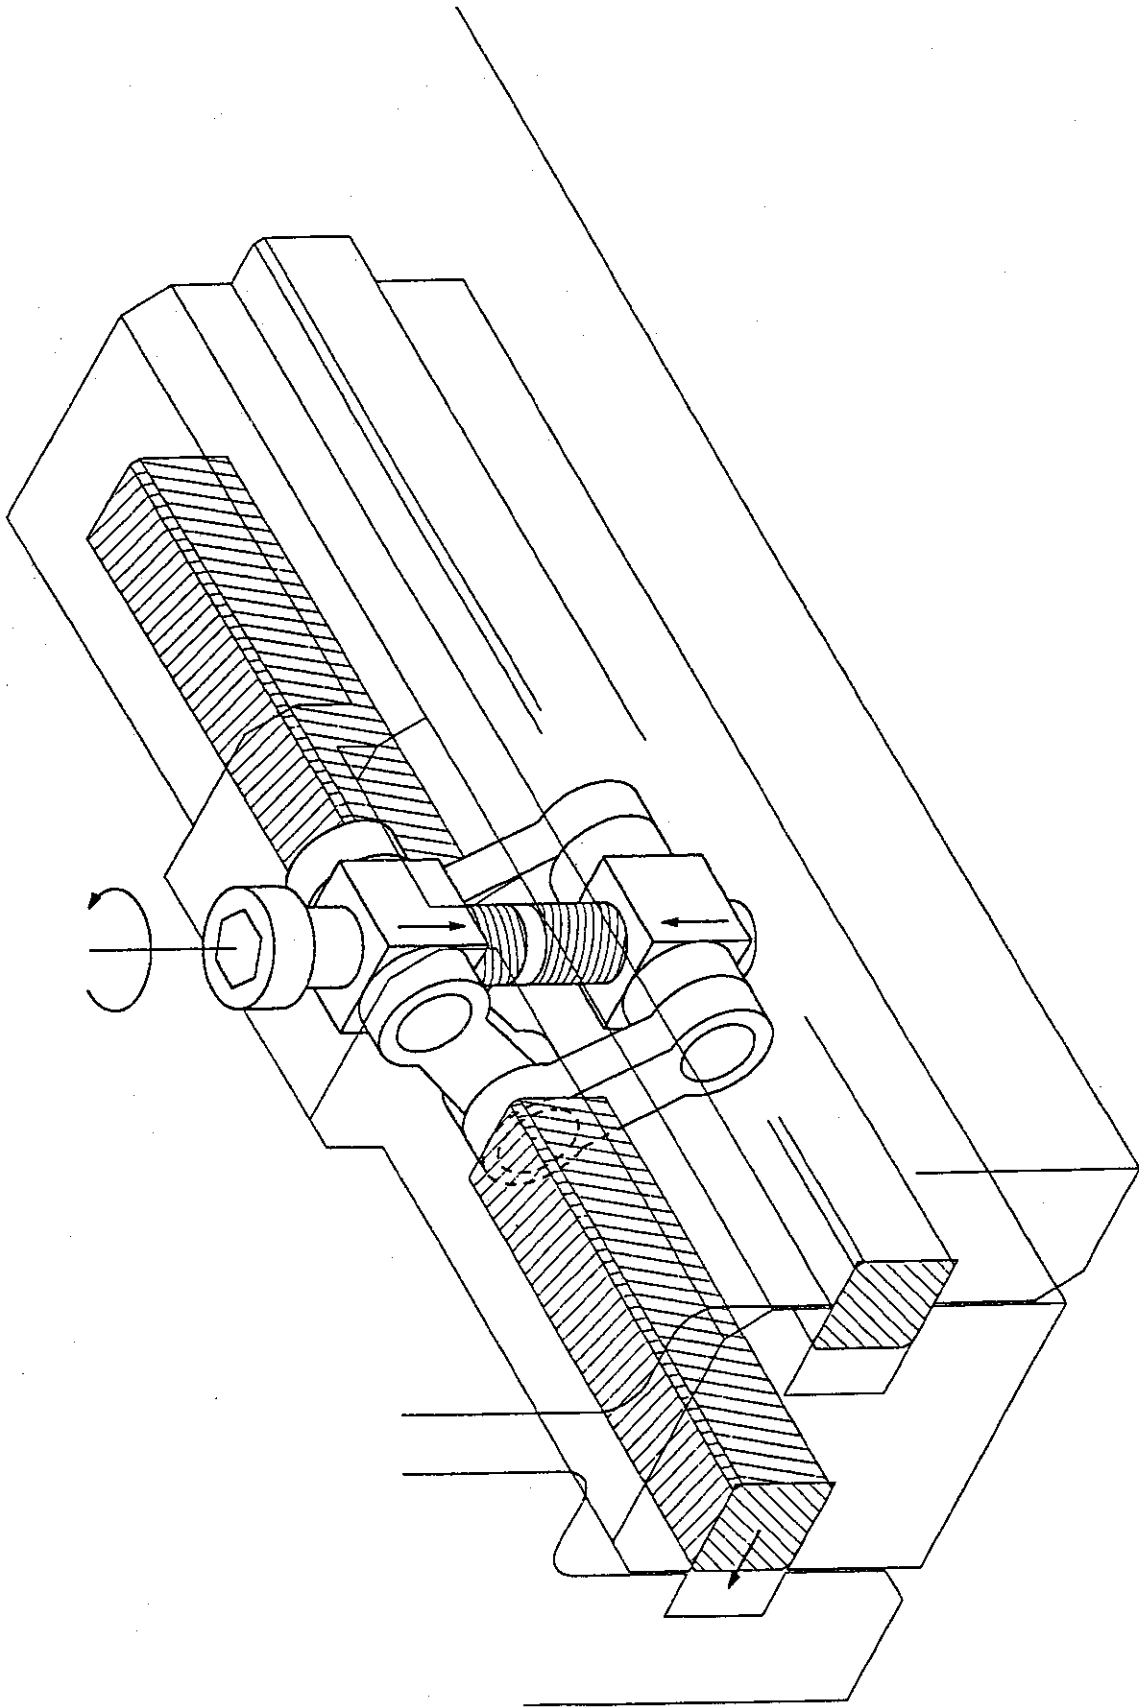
9 A three - dimensional view of the key driving mechanism, which can be driven by front access through the gap between two modules.
